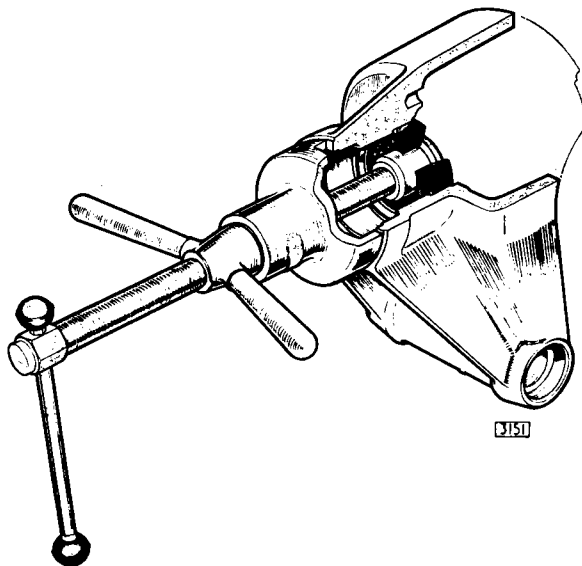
Replacing the hub bearing outer races using Churchill Tool No. J.20A with adaptor No. J.20A-1
